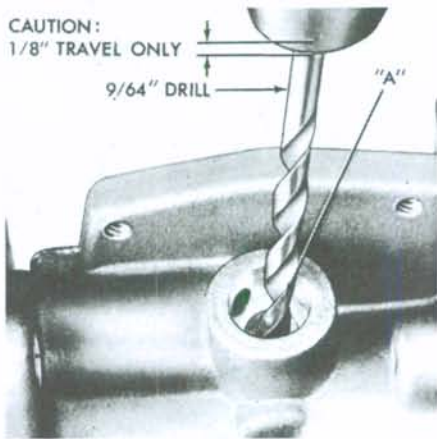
On models with fuel pump, refer to text for removal of outlet check valve.
